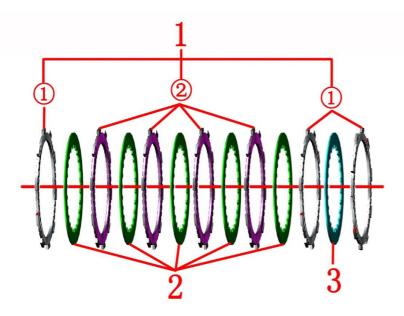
RIGHT CRANKCASE COVER ASSEMBLY		Clutch assembly-2	CHK	Q
